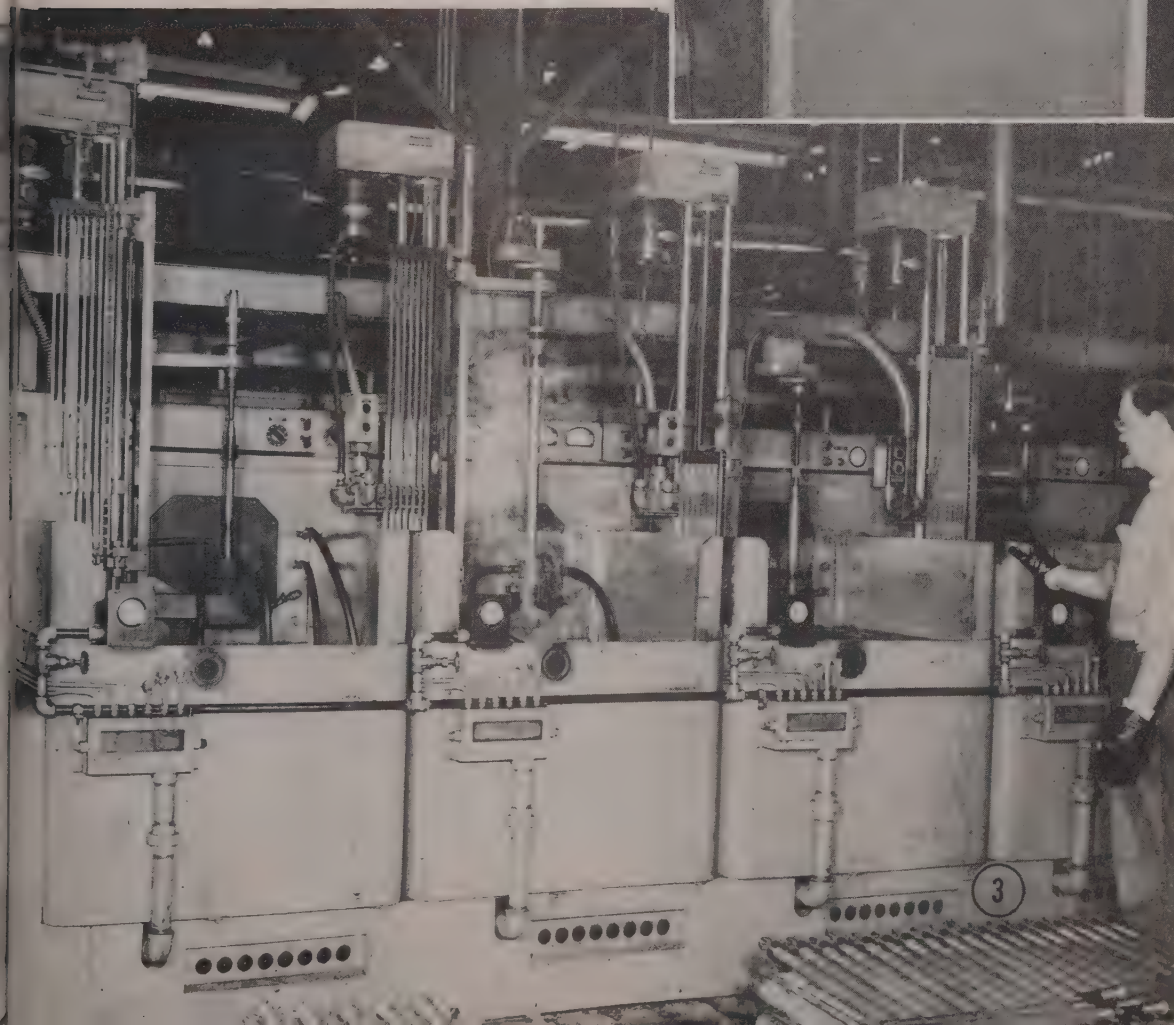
Air locks hold split inductor blocks in place during hardening of crankshaft
